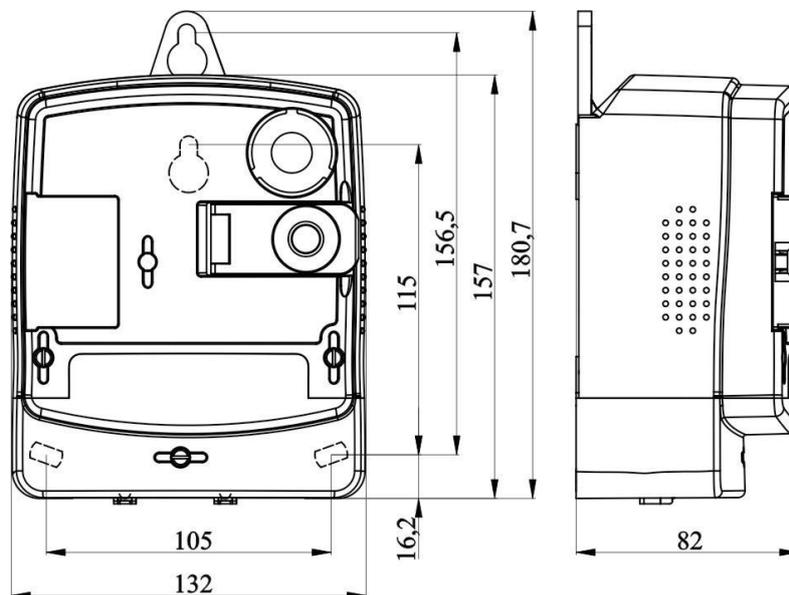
Overall and fixing dimensions of the ME381 meter fitted with a short terminal cover
